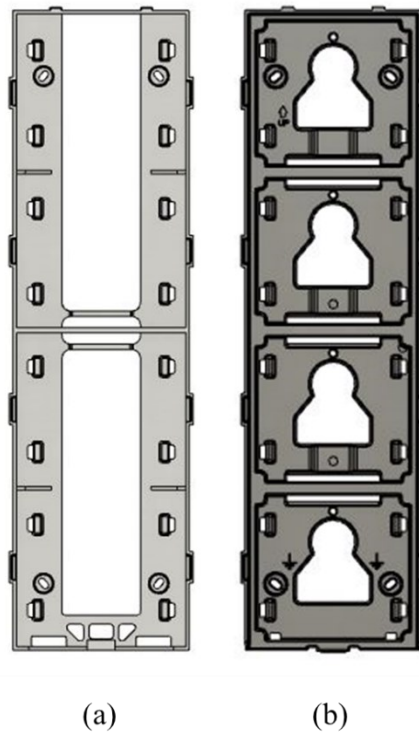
Front view of a) Prototype frame by GD and b) Commercial frame.
